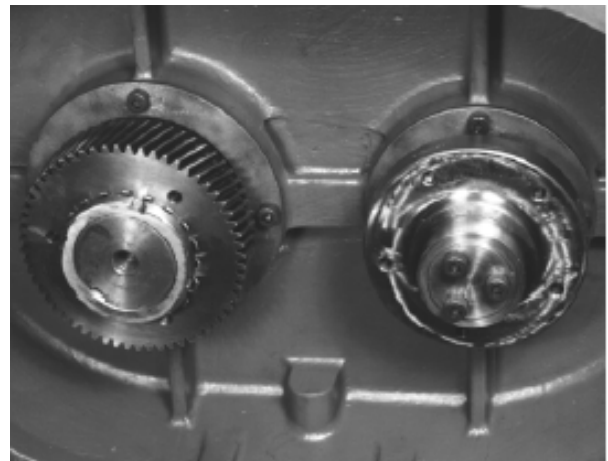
INTALL HUB & PINION PULL TIGHT
